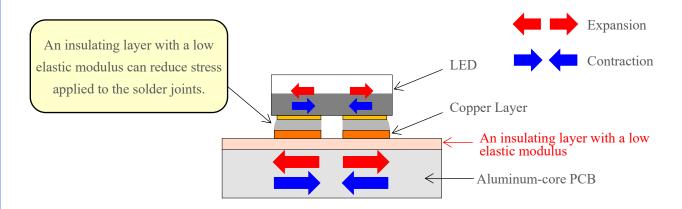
Aluminum-core PCB Containing an Insulating Layer with a Low Elastic Modulus
